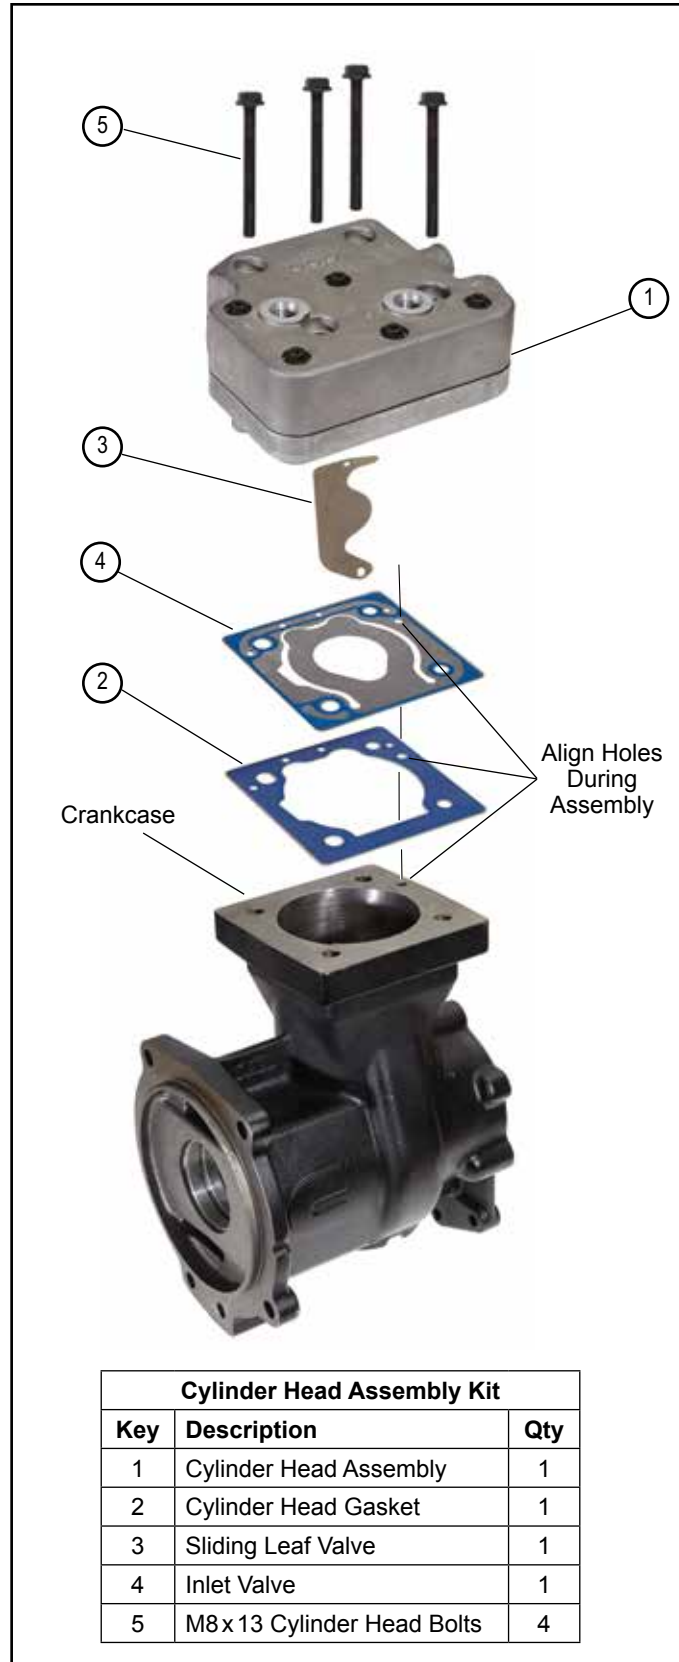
WABCO® 85MM COMPRESSOR CYLINDER HEAD ASSEMBLY EXPLODED VIEW
